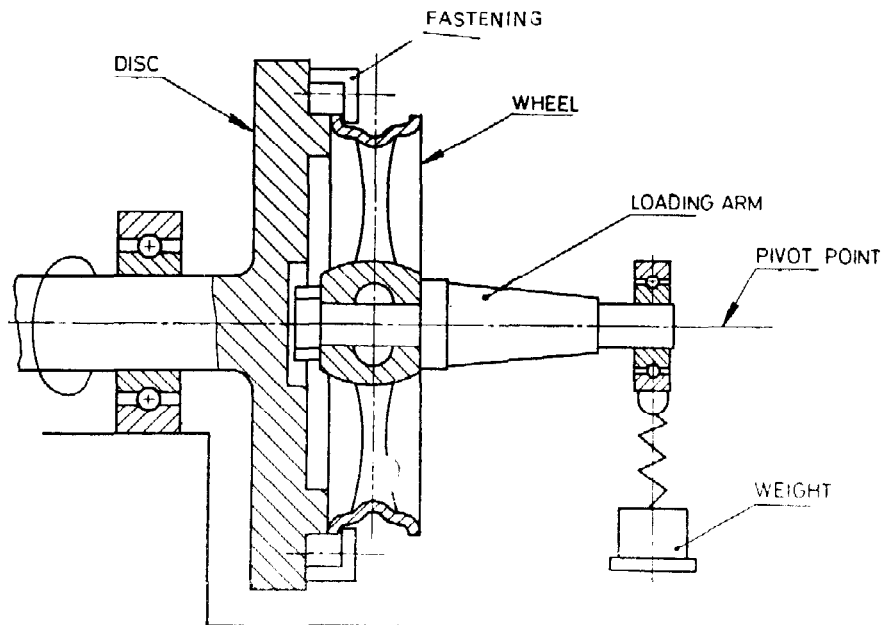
MODEL EQUIPMENT FOR CORNERING FATIGUE TEST
